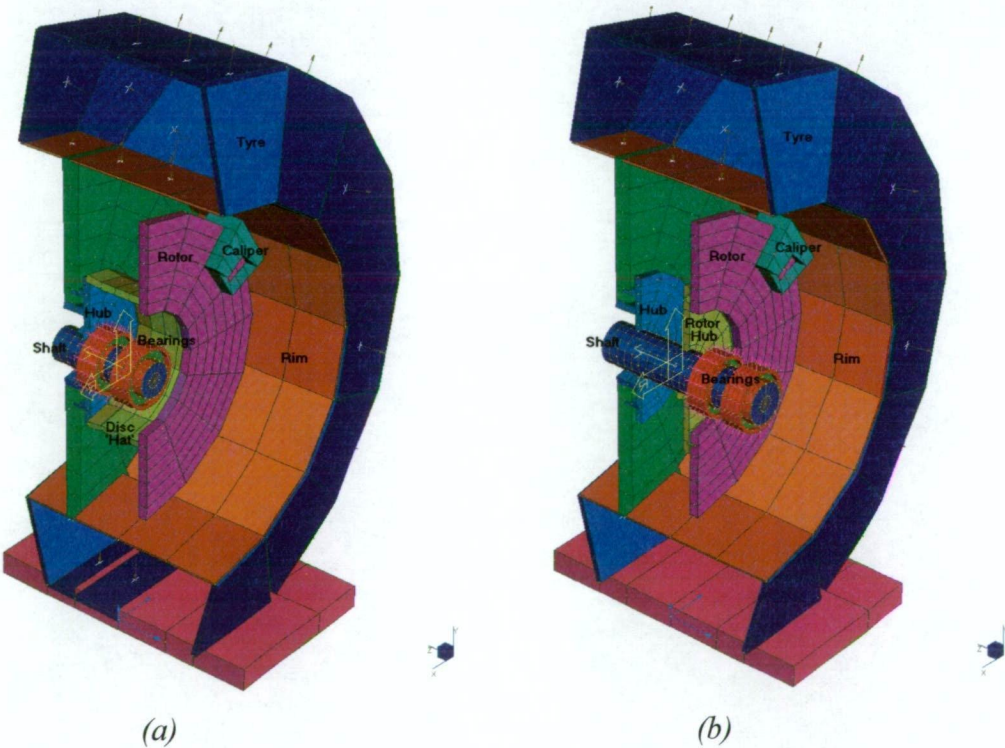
FEA wheel model cross sections, (a) centred bearings, & (b) off centre bearings
